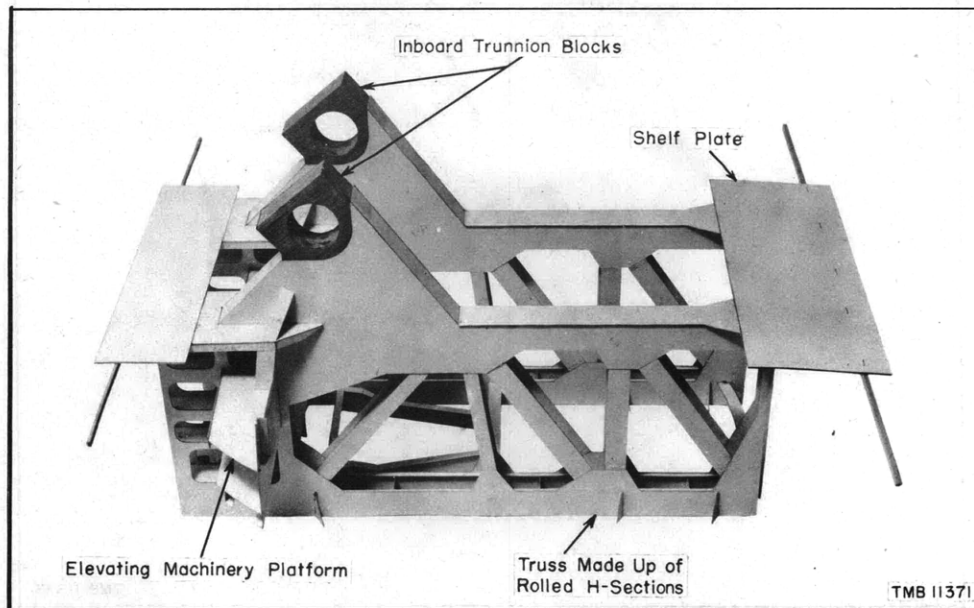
Inboard Gun Girders of Cardboard and Wood Model of CA139 Turret
